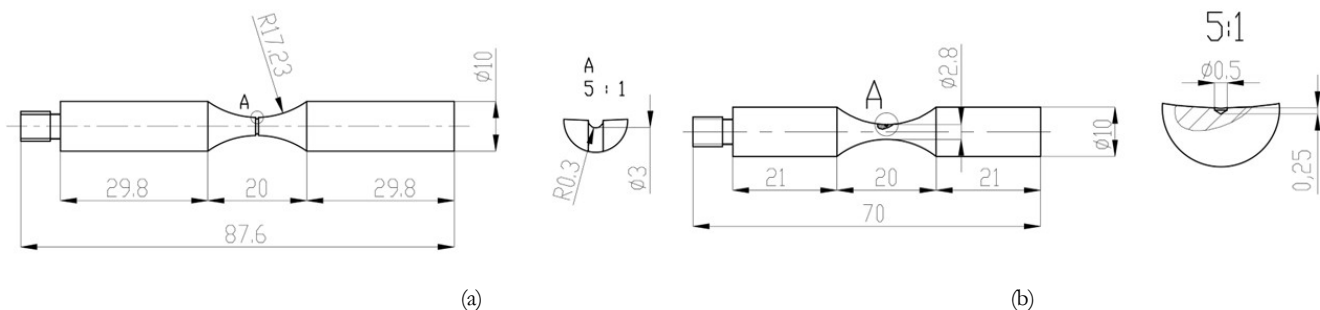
Geometries of the specimens used by [8]: (a) notched specimens (b) drill hole specimens.
